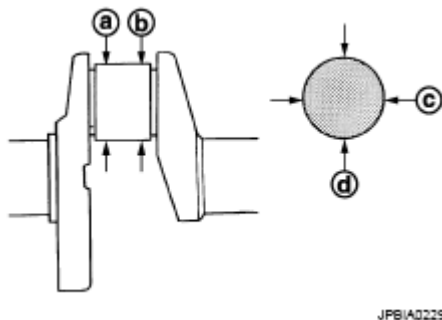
Identifying Crankshaft Out-Of-Round And Taper
